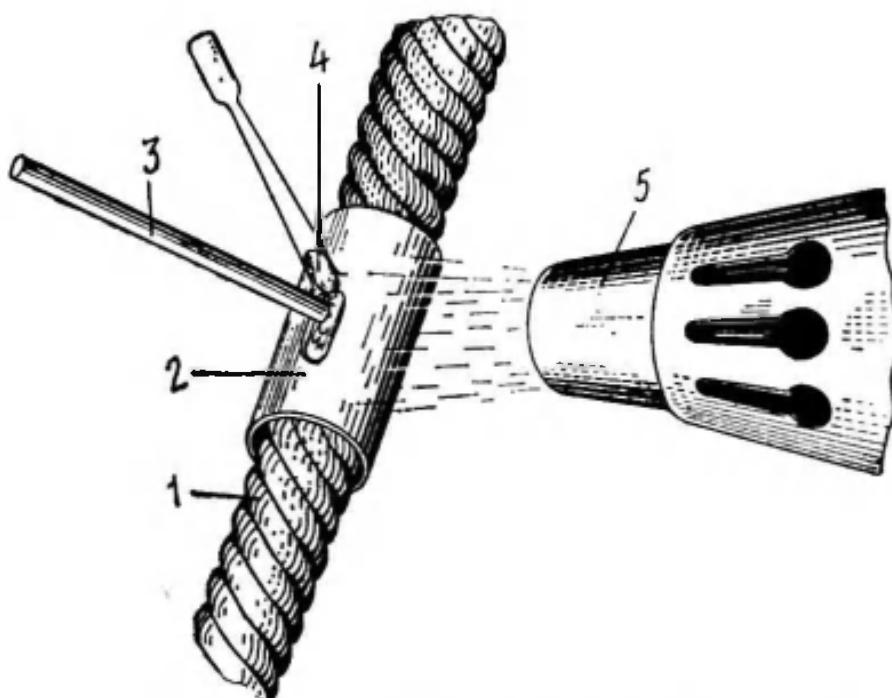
Soft soldering of leads with the use of a sleeve
